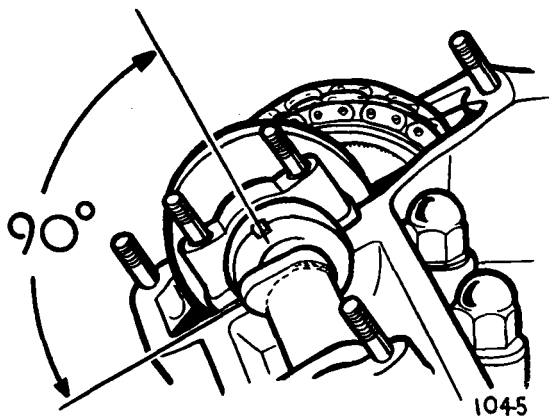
When fitting a camshaft the keyway must be at 90° to the camshaft cover face.
